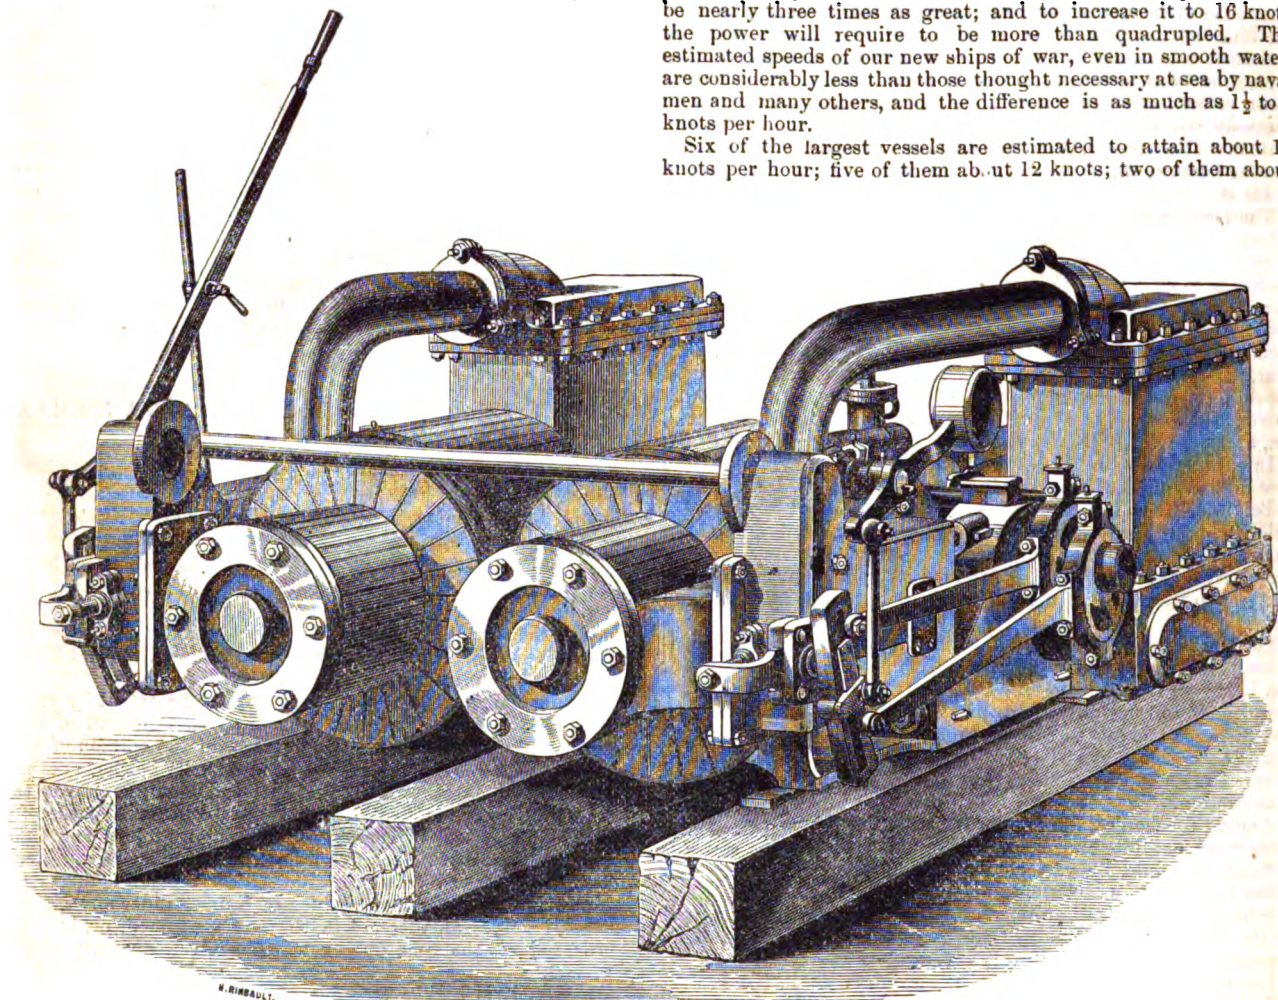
E. E. ALLEN'S PATENT END-TO-END CYLINDER DOUBLE PISTON ROD ENGINE.—View from Small Cylinder end.
